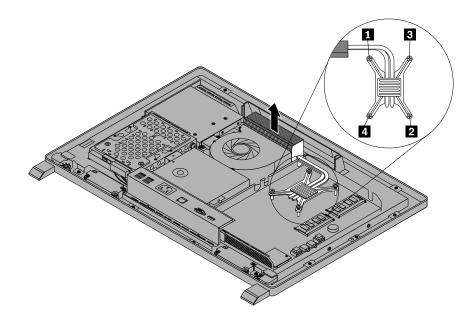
Loosing the four screws that secure the heat sink assembly to the system board
